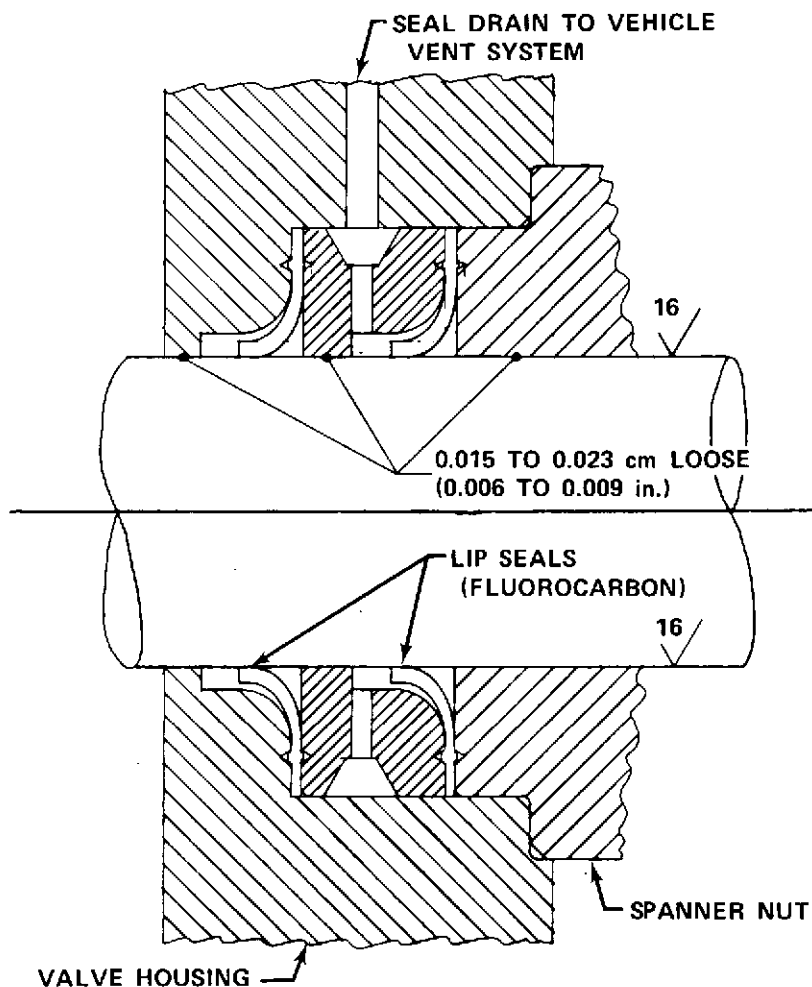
Typical Sliding and Rotating Shaft Seals FD 72495
